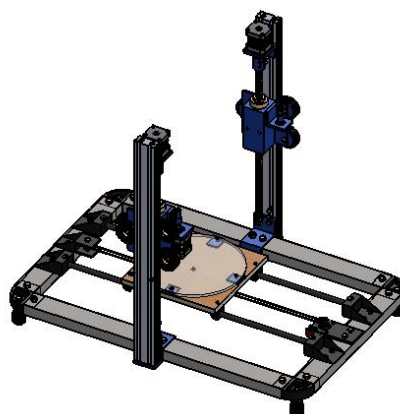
Z axis linear rails and aluminium extrusion assembly
